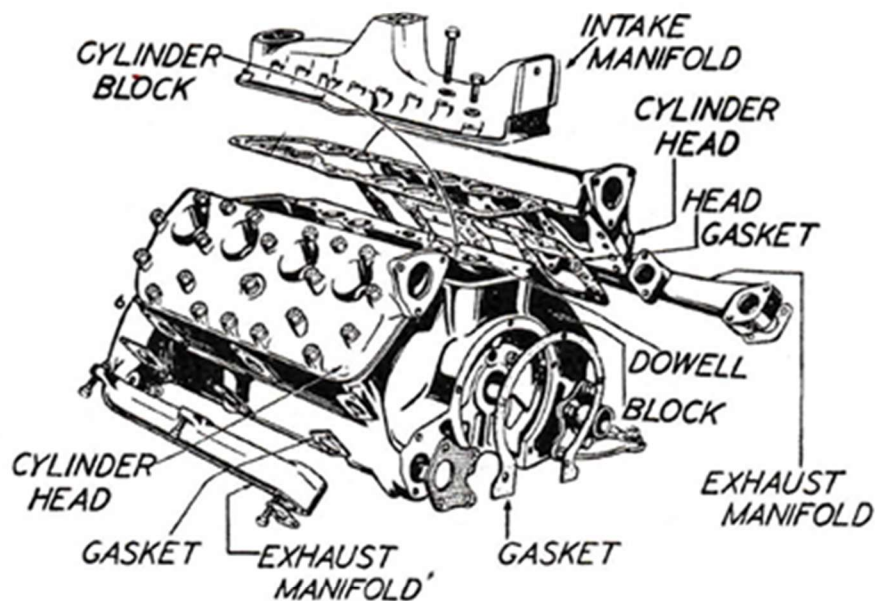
Ford V-8 Cylinder Block with Related Parts
